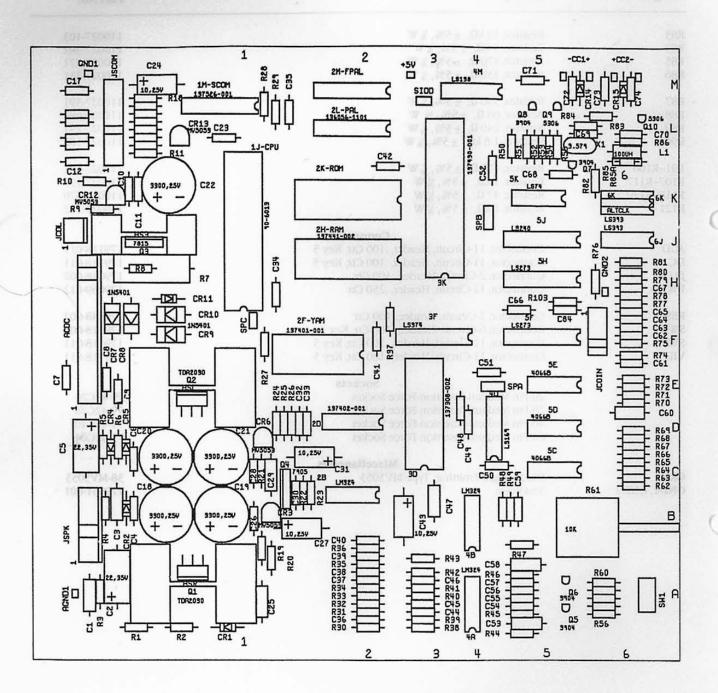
Stand-Alone Audio PCB Assembly A043713-21 B
